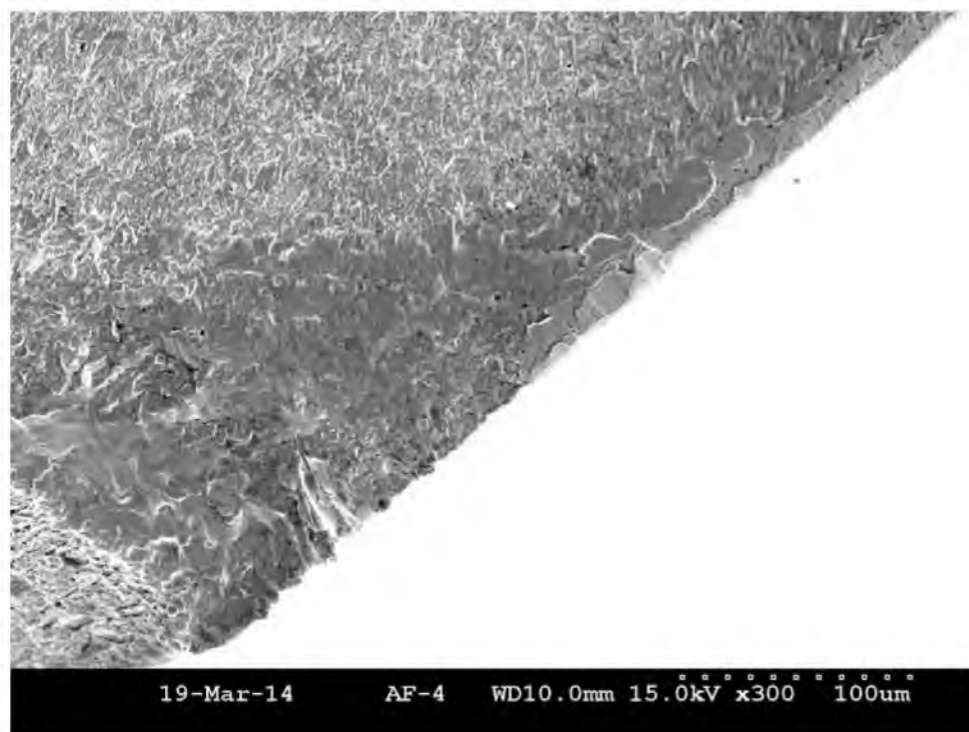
300x End of GT270-14 Fatigue Crack Image
